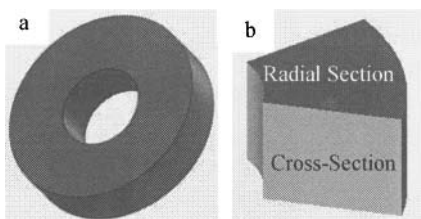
Alloy samples a) Extruded torus and b) Sample surfaces examined.
